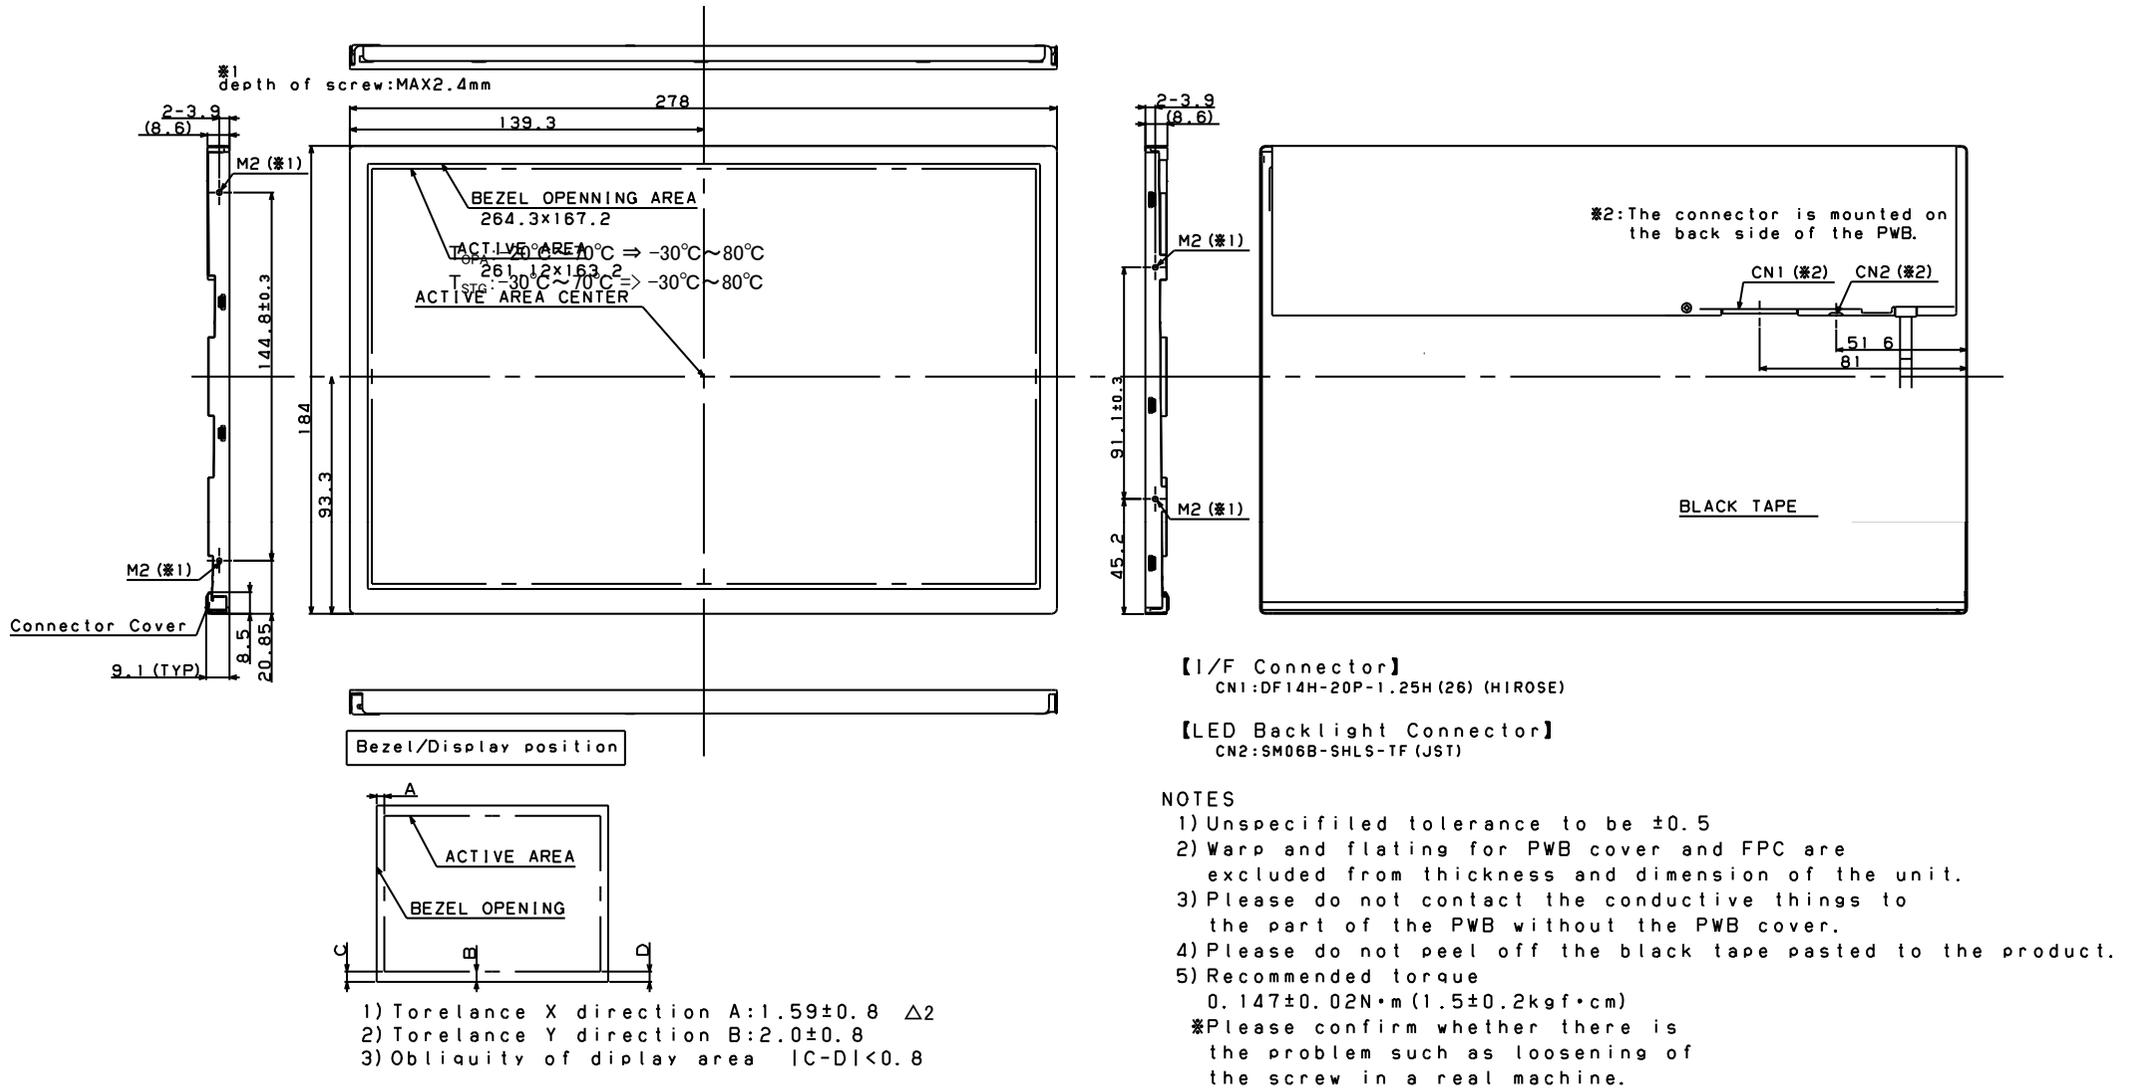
LQ121K1LG52 OUTLINE DIMENSIONS
